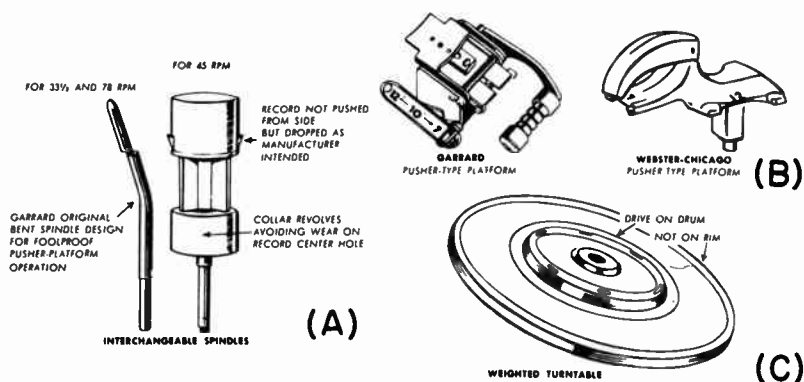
(A) Spindles, (B) Pusher Platforms, (C) A Weighted Turntable
